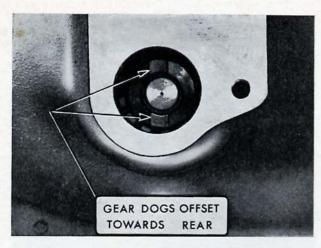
Location of oil pump drive gear dogs when installing the distributor. The dogs are at right-angles to the camshaft and offset as shown
